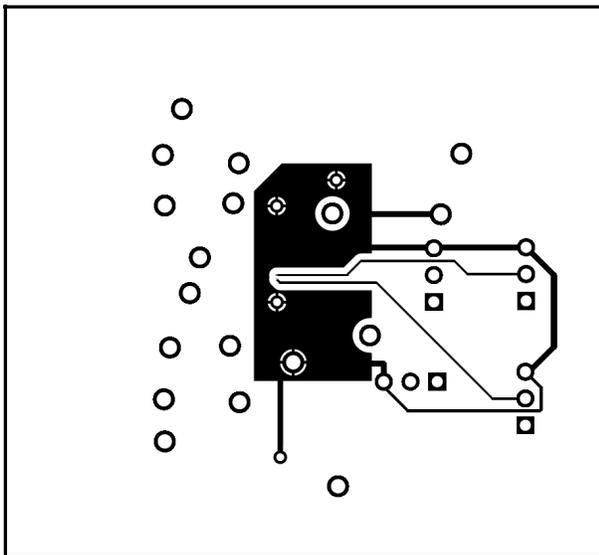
INA2191EVM Bottom Layer for Single Panel
